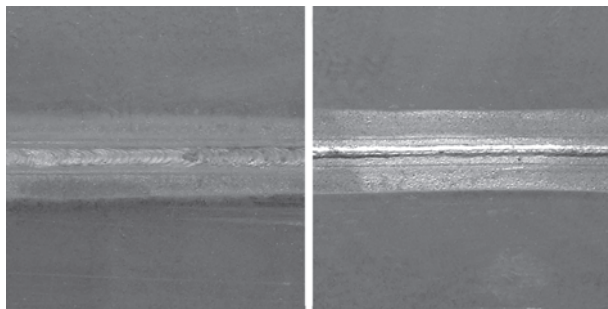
Visual aspect of the surface and root respectively of the weld (specimen "as is")
